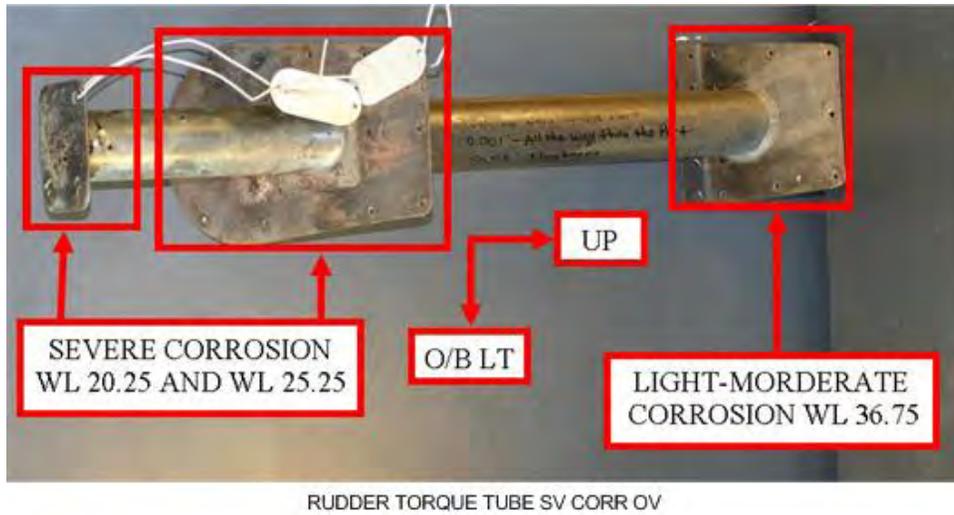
Location of Light-Moderate and Severe Corrosion on the Rudder Torque Tube Assembly WL 20.25 Through WL 36.75
